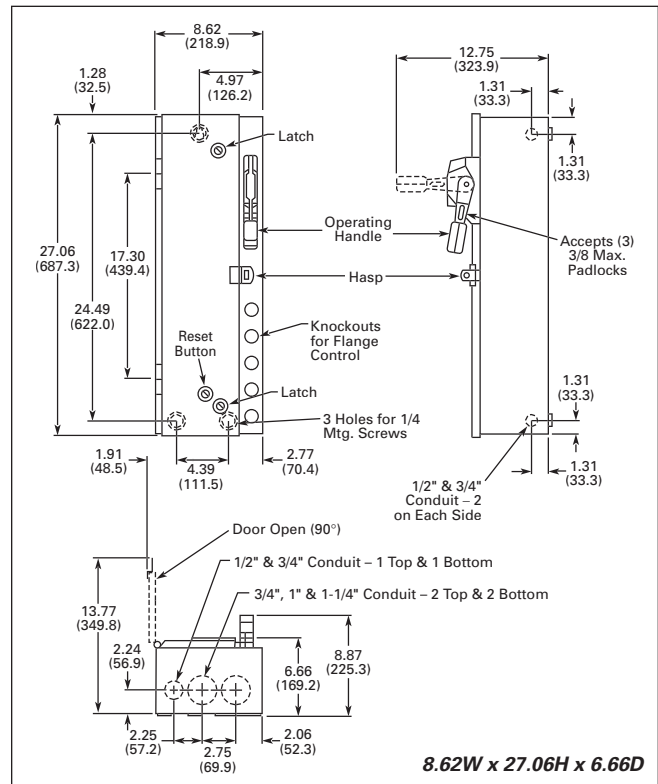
Box I, Type 1 — Approximate Dimensions in Inches (mm)
